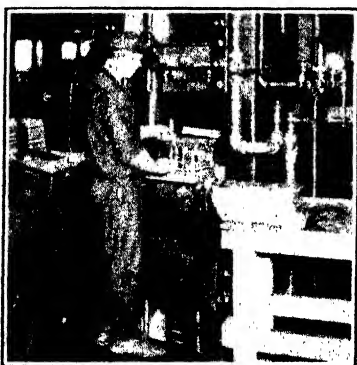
Press with air cushion attachment for drawing a rectangular shell. Note convenient pressure dial and regulator valve. (*Courtesy Marquette Tool & Mfg. Co.*)
